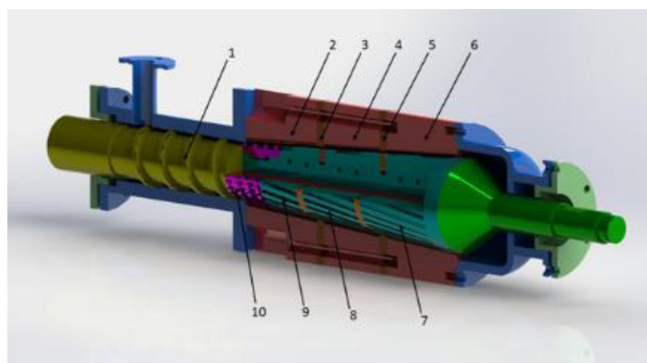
The powerful shear mixer. (1) conveying screw thread; (2) coarse thread casing; (3, 5) baffle; (4) fine thread casing; (6) micro thread casing; (7) micro thread shear blocks; (8) fine thread shear blocks; (9) coarse thread shear blocks; (10) scattered pieces.
